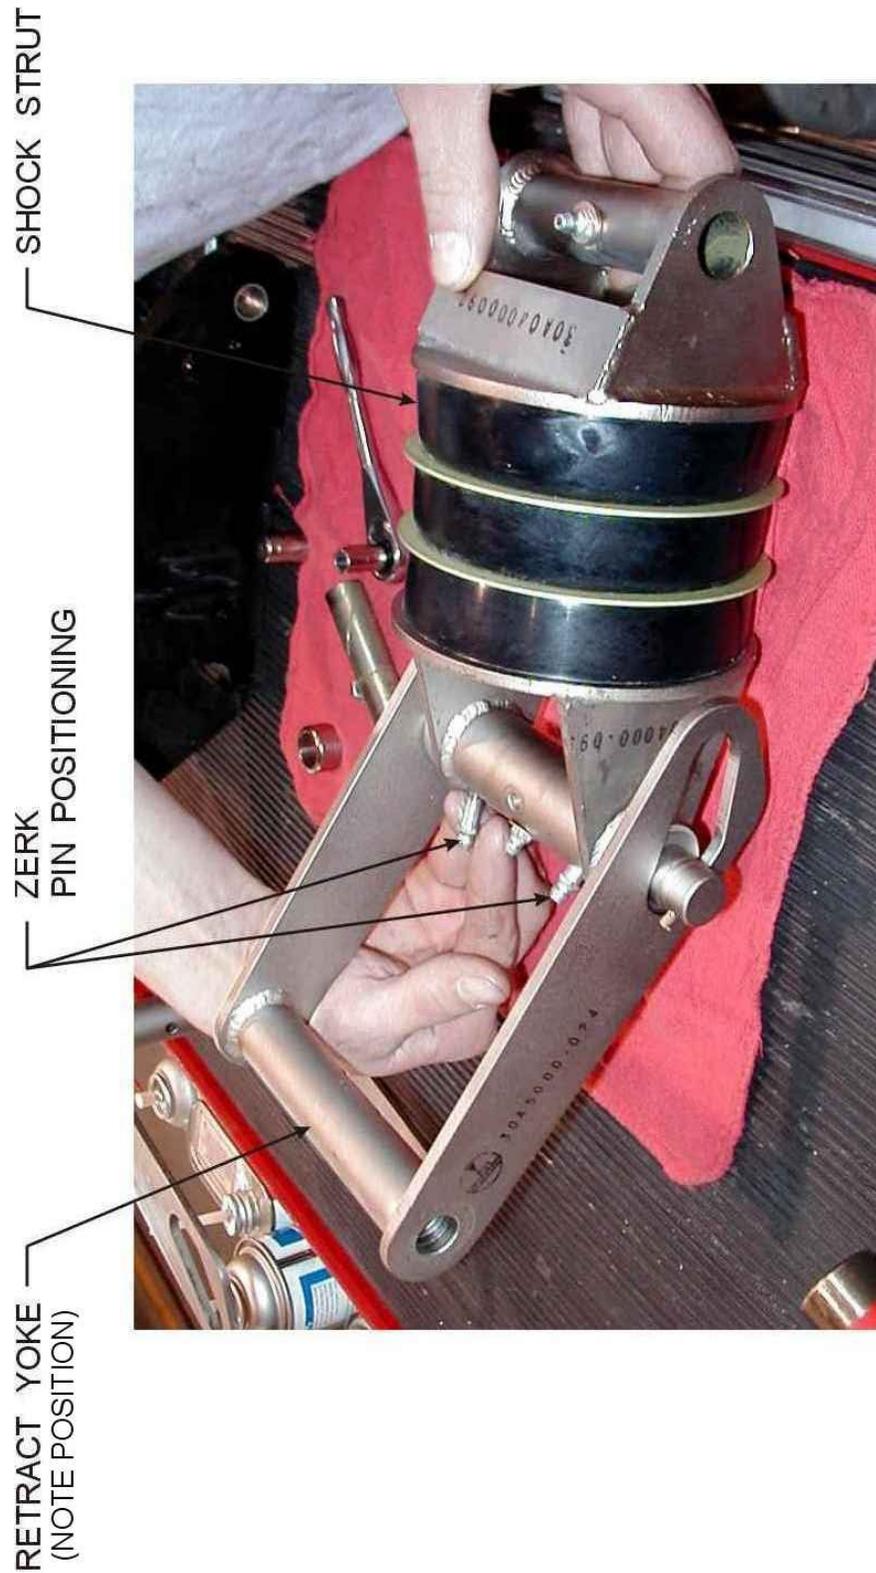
POSITION OF RETRACT YOKE TO SHOCK STRUT
